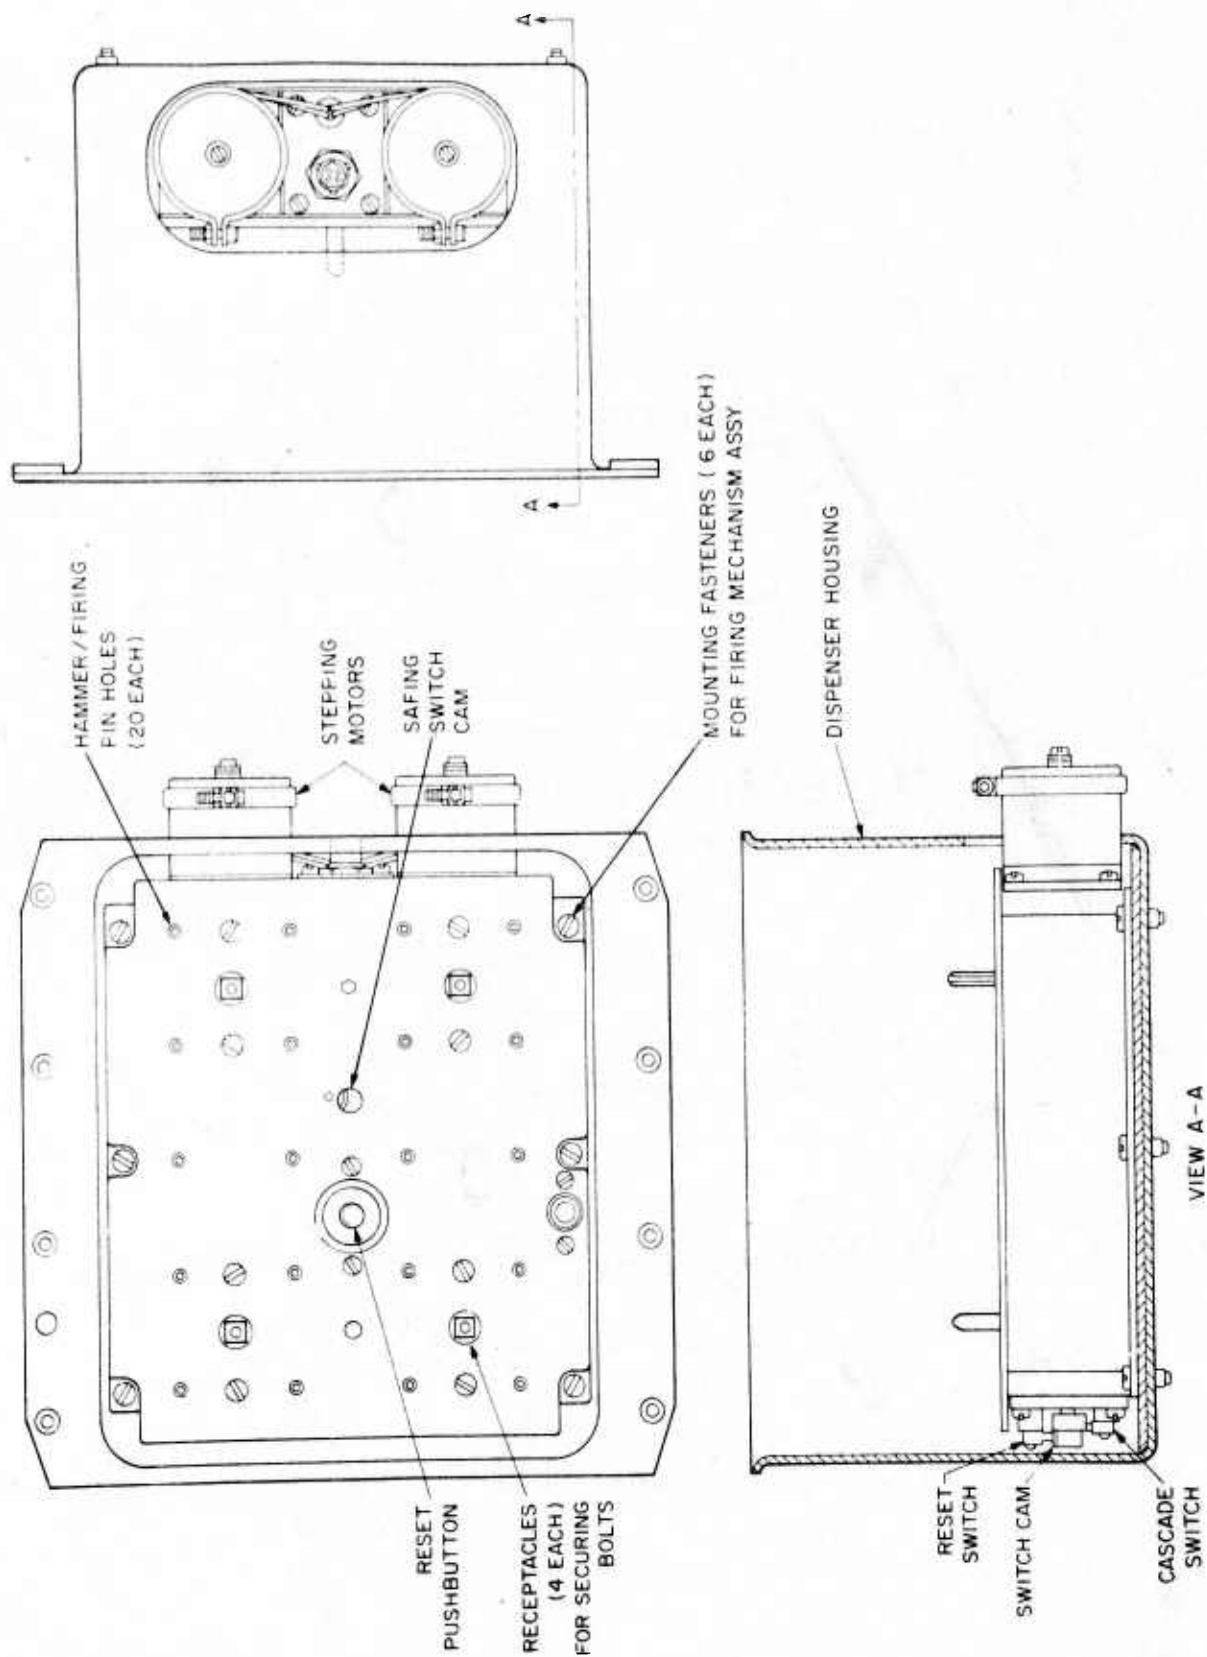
DISPENSER ASSEMBLY (MODULE REMOVED)
